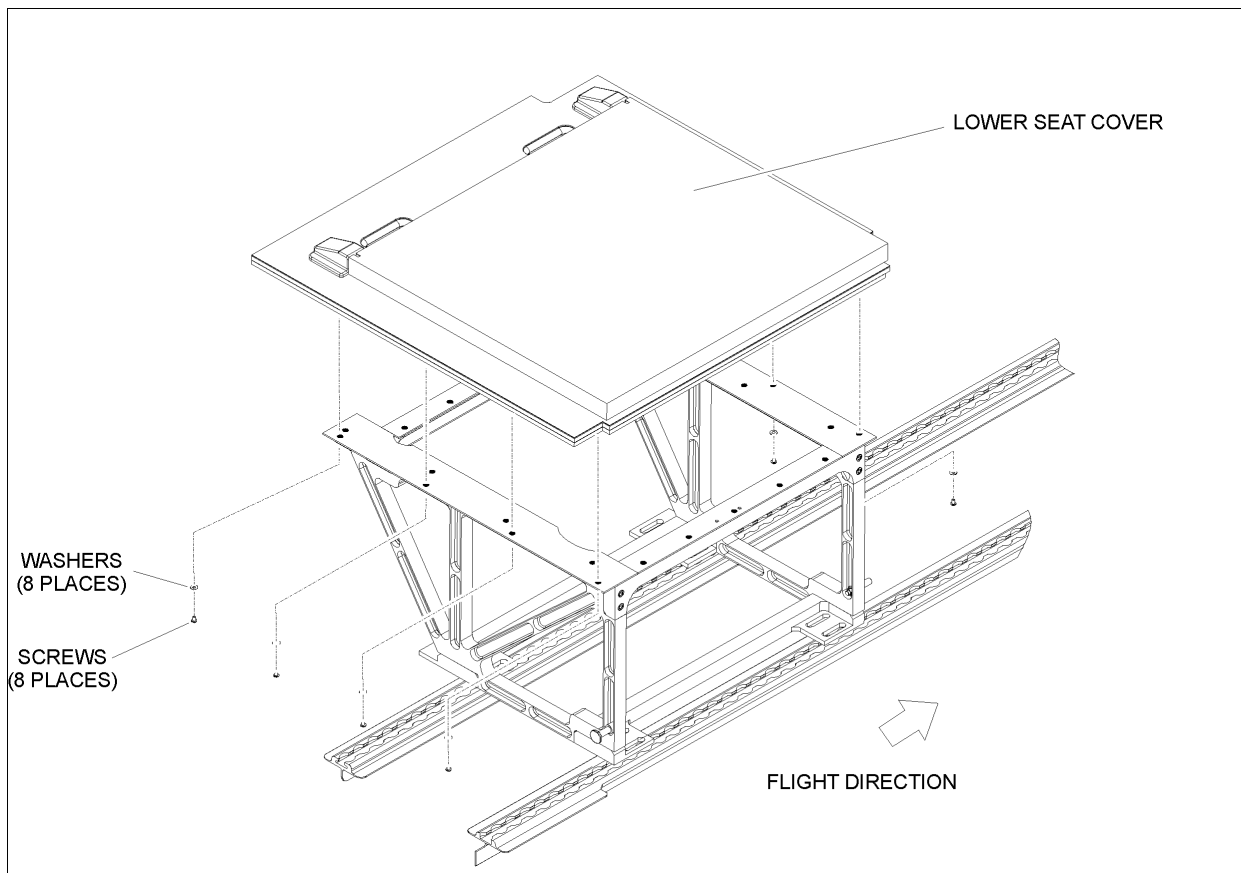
Lower Seat Cover (Ferry Flight Configuration) - Removal
